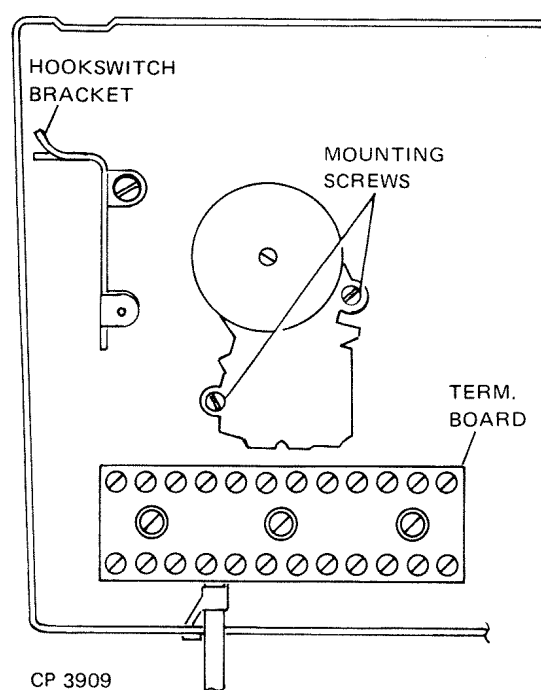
S-C Series 20 Straight-Line Ringer Mounting
